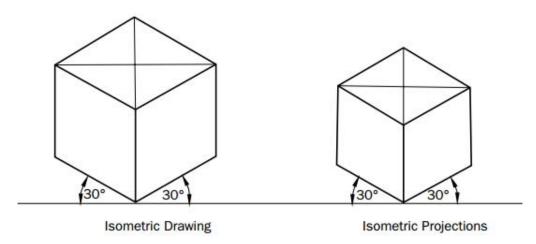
Isometric drawing is 22.5% larger than isometric projection
